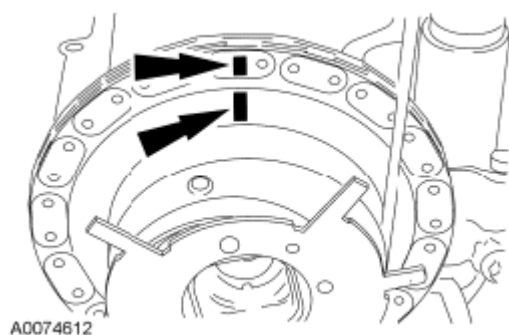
Locating Mark On Timing Chain And Camshaft Phaser And Sprocket Assembly
